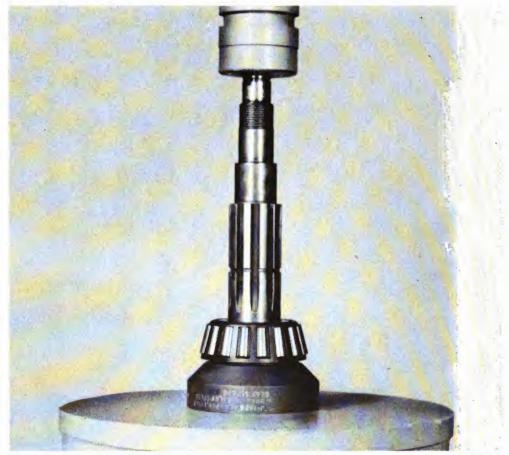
Removing Pinion Low Speed Gear Bearing Sleeve and Thrust Washer
